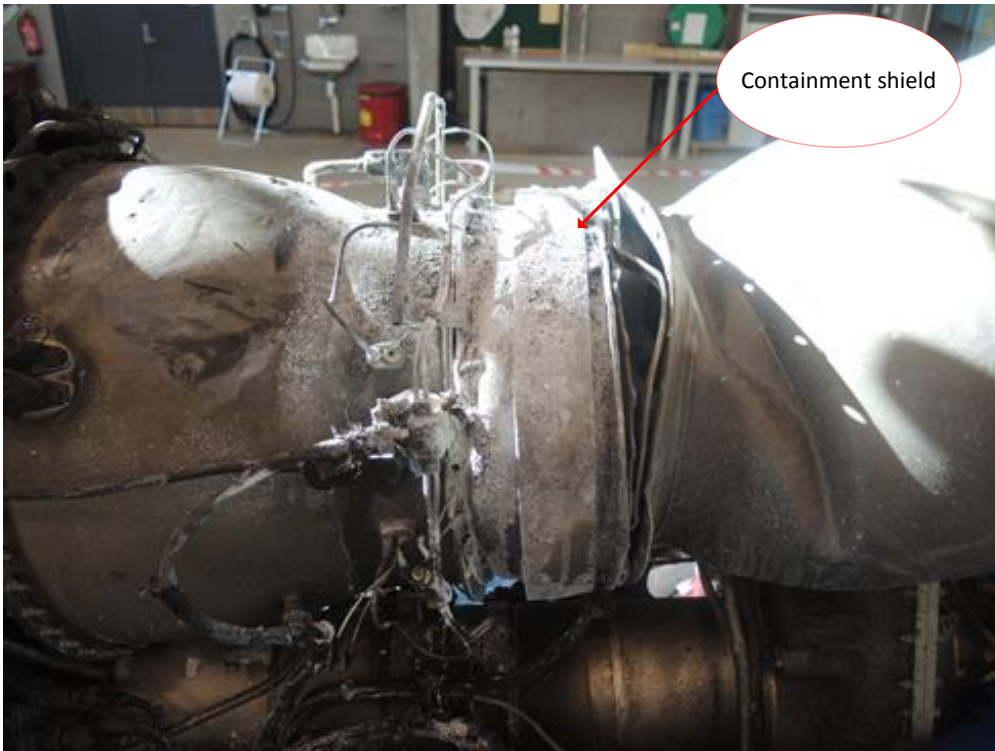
The "containment shield" and deformed turbine casing. Photo: AIBN
